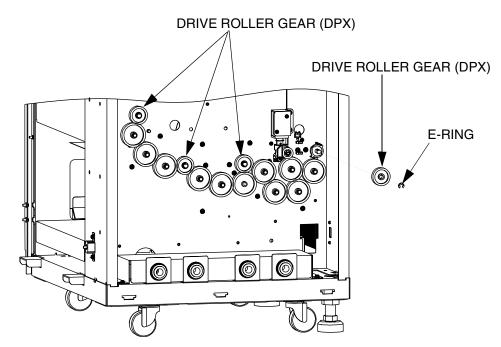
Removal of the Drive Roller Gear (DPX)
